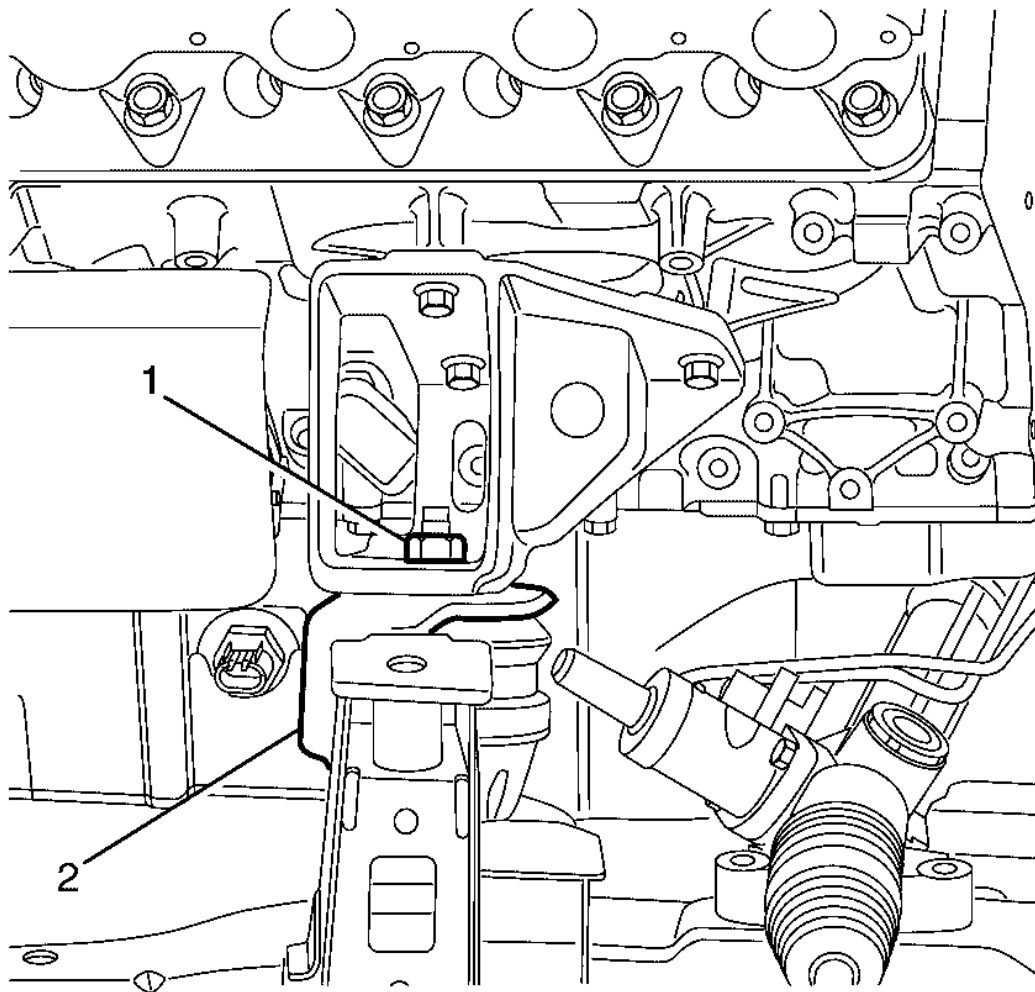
Identifying Upper Right Side Engine Mount To Engine Mount Bracket Retaining Nut
